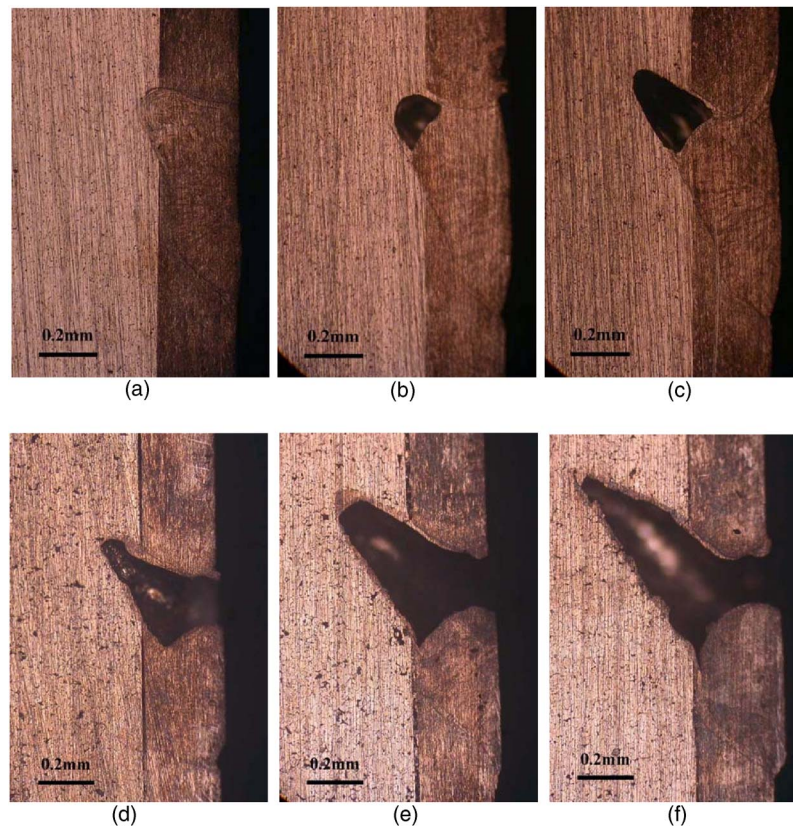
The welding joints of MIM SS316L (left) and SS304L (right). (a) P: 1.0 kW and T: 3 ms. (b) P: 1.2 kW and T: 3 ms. (c) P: 1.4 kW and T: 3 ms. The welding joints of PM SS316L (left) and SS304L (right). (d) P: 1.0 kW and T: 3 ms. (e) P: 1.2 kW and T: 3 ms. (f) P: 1.4 kW and T: 3 ms.
